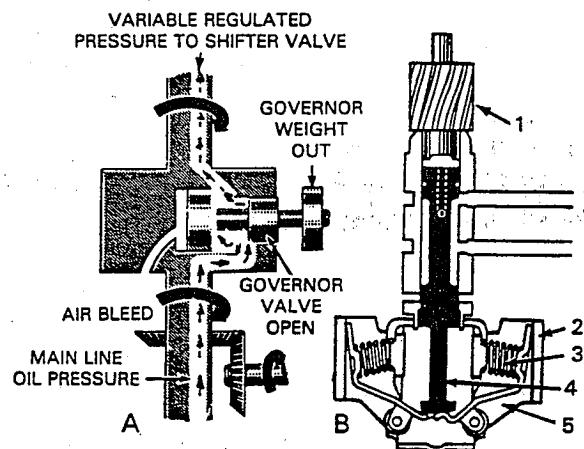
A—Schematic of governor valve in open position. Note main line oil pressure is now passing through valve. B—Cross section of a different type of governor. 1—Driven gear. 2—Primary weight. 3—Spring. 4—Valve. 5—Secondary weight. (GMC)
